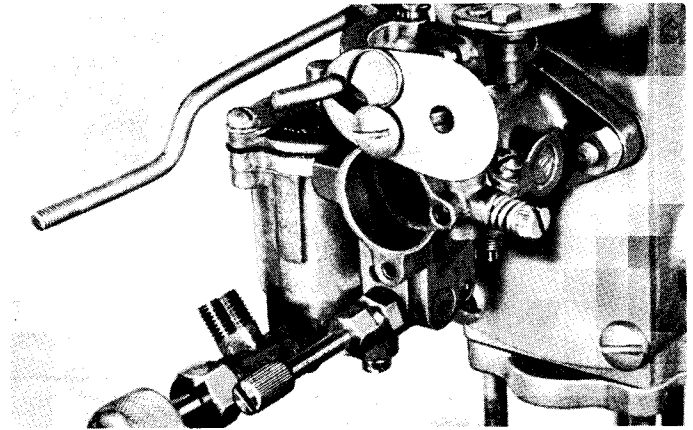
Carburetor Assembly Installed on 2-Cylinder Mark 7 Engine
